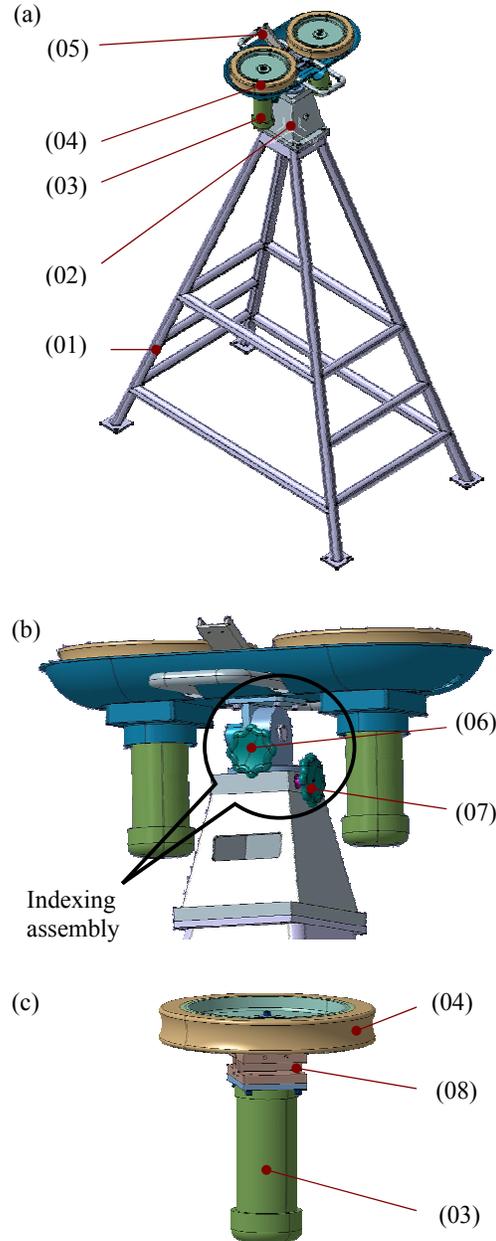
3D CAD Model (a) Full Assembly, (b) Indexing Assembly (c) Wheel –motor Assembly
